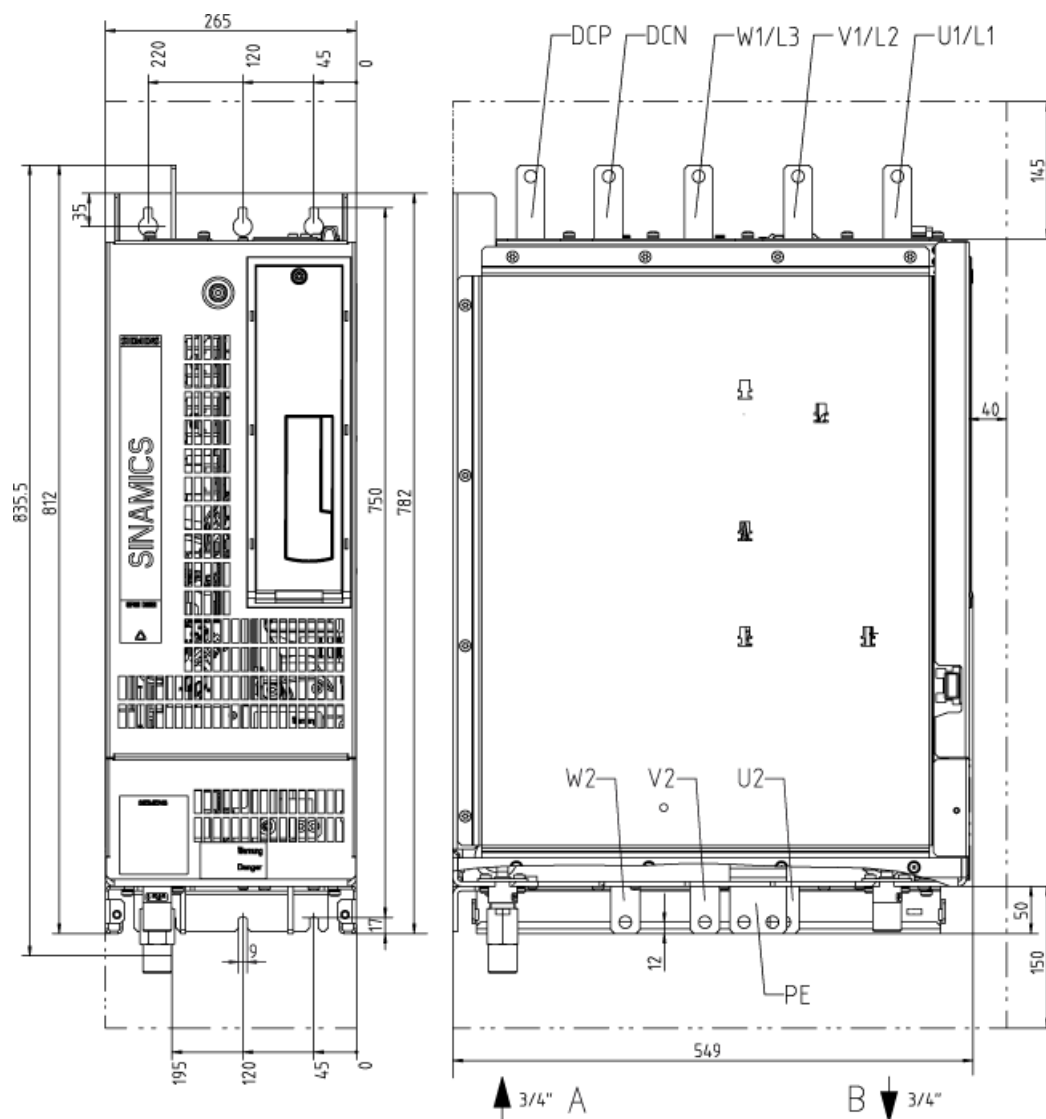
Dimension drawing Power Module, frame size FL, front view, side view
